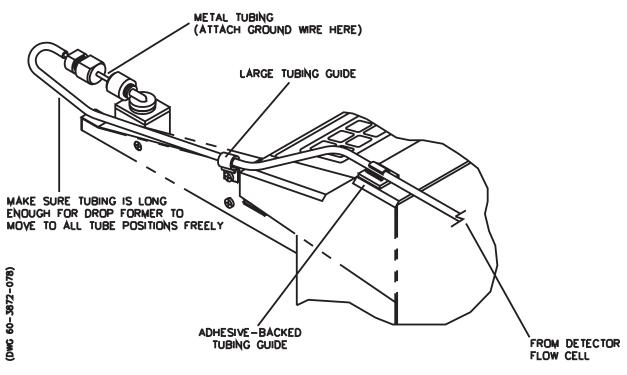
Connecting Grounded Metal Tubing to the Drop Former
